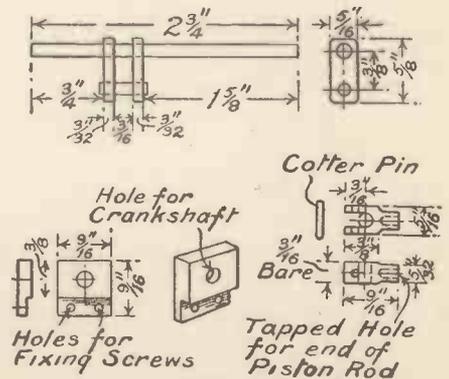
Details of Crankshaft, Bearings, and Piston Rod Head.
